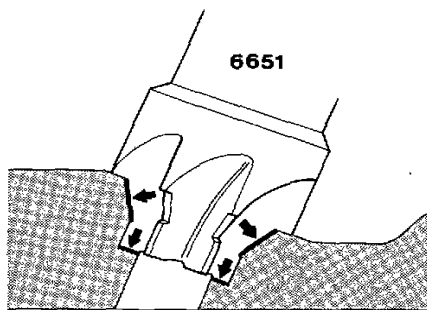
Cutting the seat for the copper sleeve (step 1)
